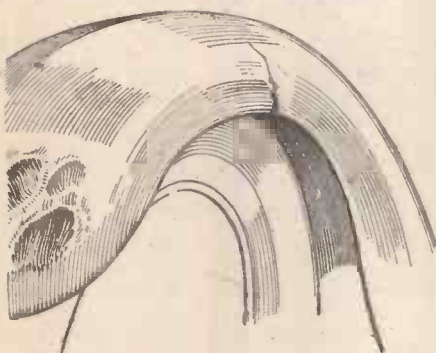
Cracks such as this should be welded. A local welder will often do the job without the wing being removed from the car.
